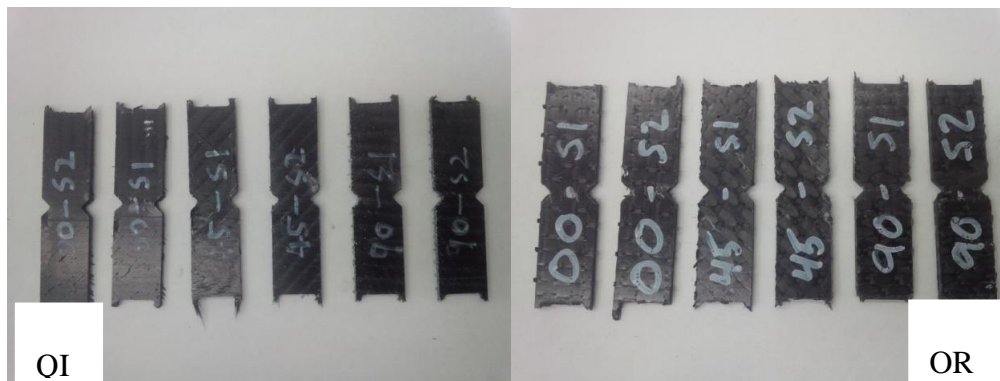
Typical Shear Specimens after being loaded in shear
